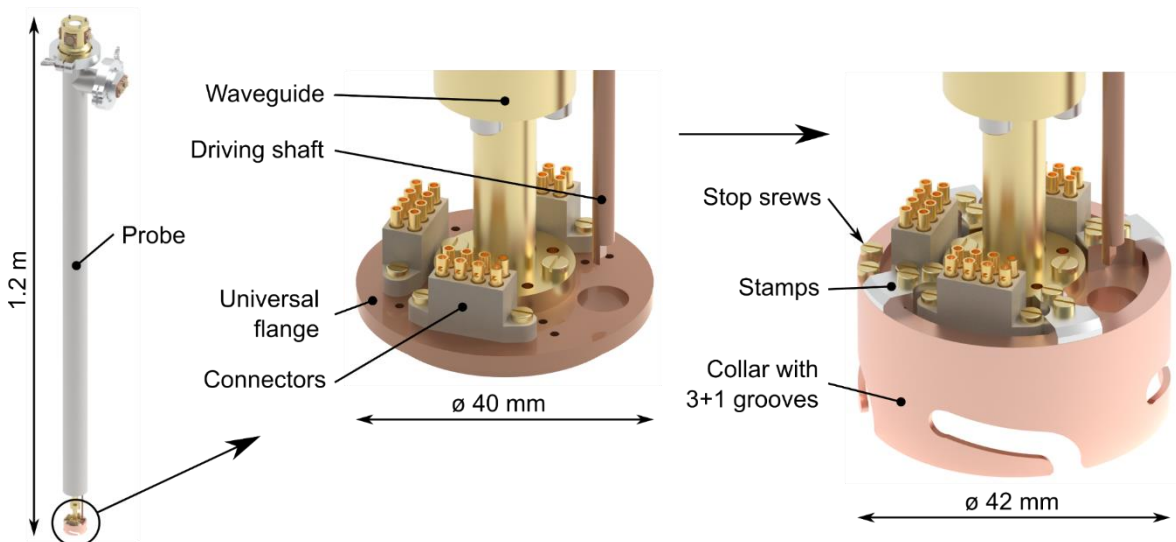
Left: Probe with a detailed view on the design of the universal flange. Middle: Flange details. Right: Flange using bayonet mechanism to attach sample holders.
